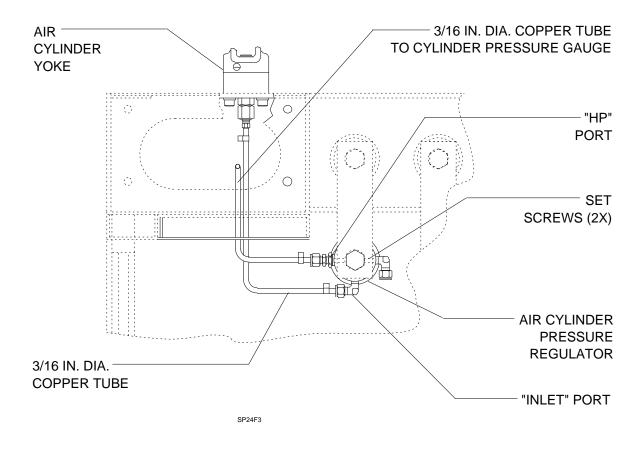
AIR CYLINDER REGULATOR MOUNTING AND H.P. CONNECTIONS
